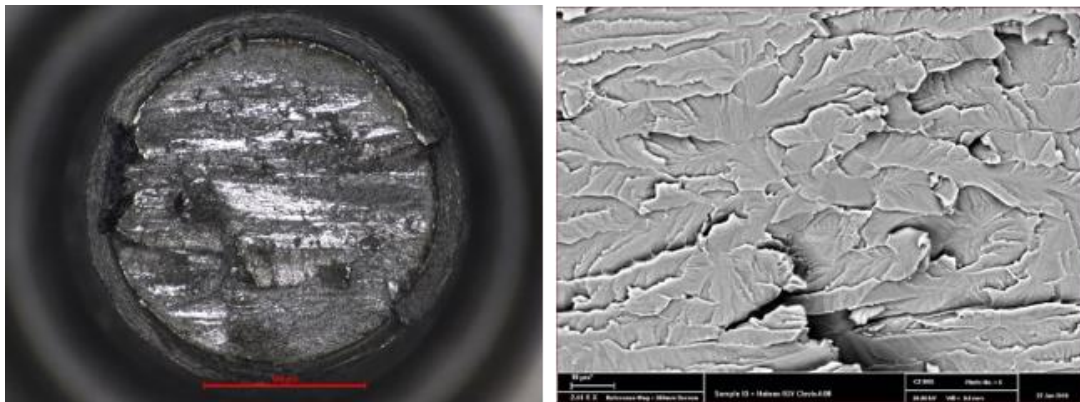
Fracture surface resulting from sustained load cracking of threaded Ti-6Al-4V part
